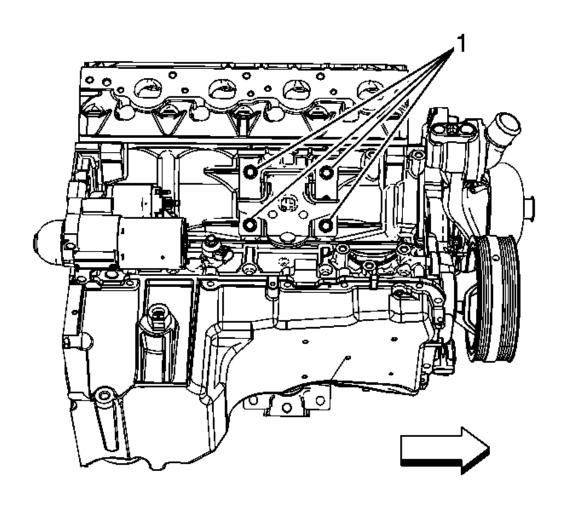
View Of Engine Mount To Engine Bolts Courtesy of GENERAL MOTORS CORP.
